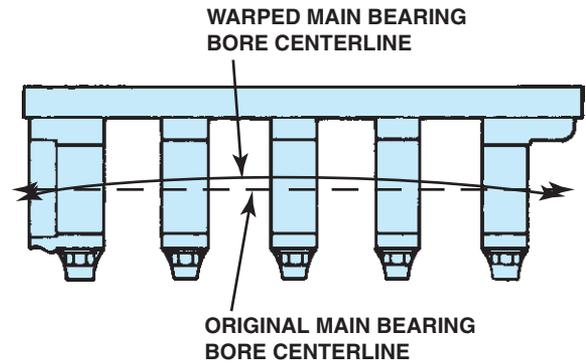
The main bearing bores of a warped block usually bend into a bowed shape. The greatest distortion is in the center bores.
